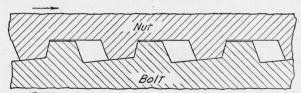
Section of the Dardelet thread for a bolt having a diameter of ¼ inch.
